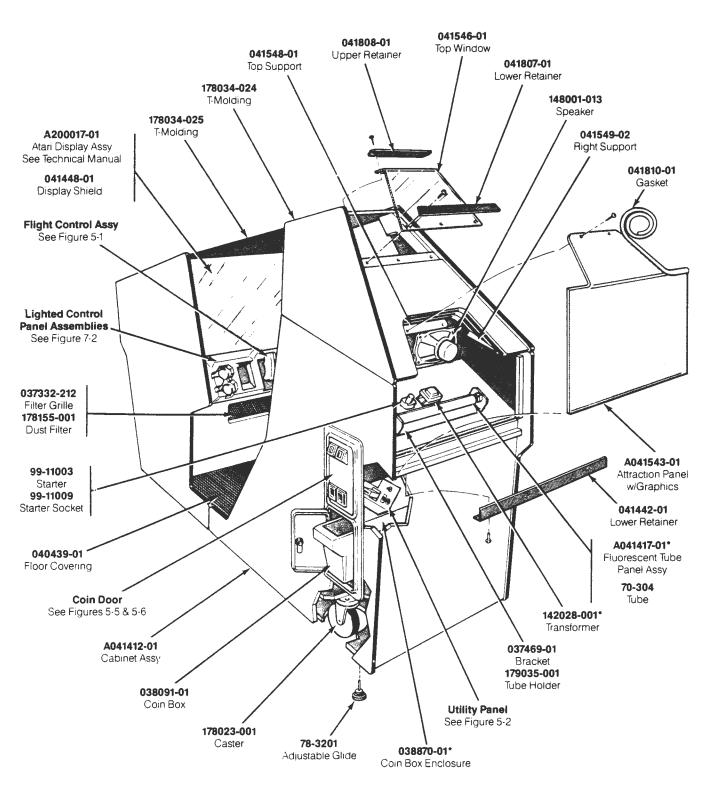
Cabinet-Mounted Assemblies, continued A041600-xx B
